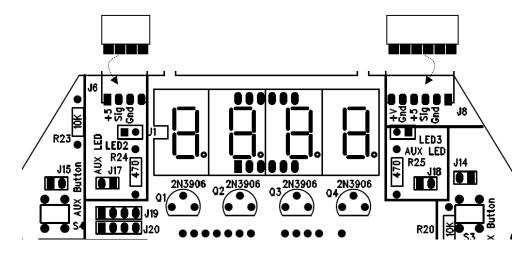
4-pin and 6-pin edge connectors (for bumper switch attachment).
